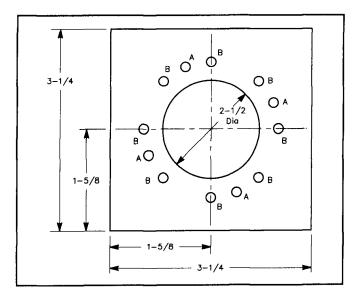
Air outlet retaining plate is made of 1/4-5/16 in. aluminum. Hard alloys, such as 6061-T6 or 2024-T6 are preferred. Holes marked A are No. 27. Locate the 4 holes equally spaced on a 2-7/8 in. diam. circle. Holes marked B are No. 35, tapped 6-32. Locate the holes equally spaced on a 3-in. diam. circle.
